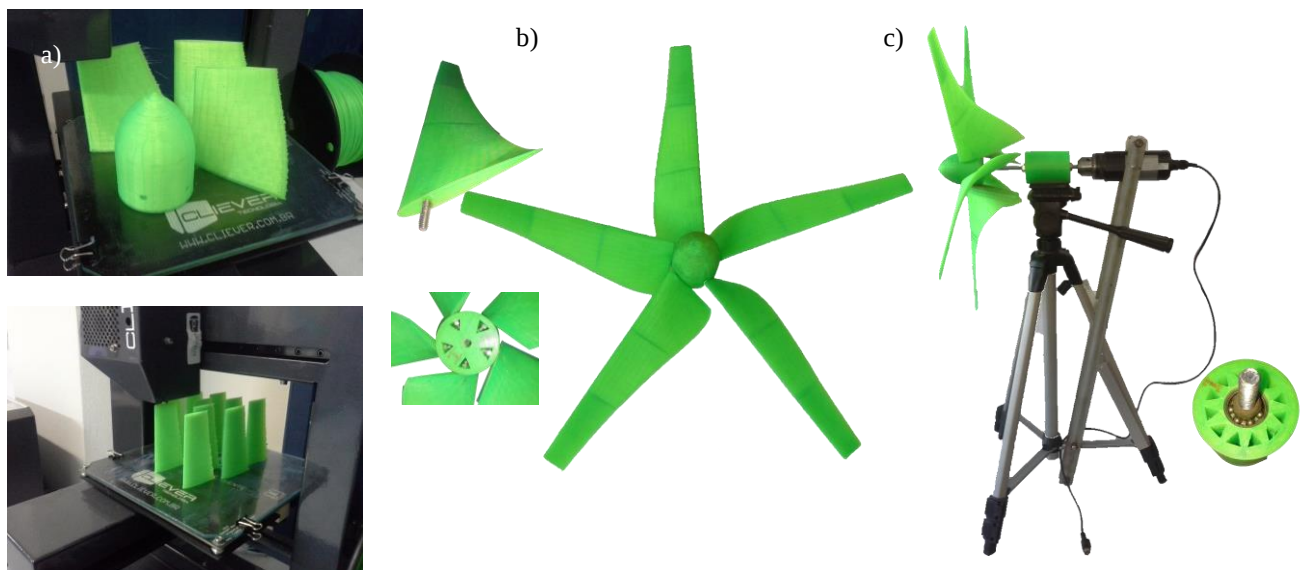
a) Printing of parts; b) Details of the socket of the blades; c) Installation and detailing the prototype shaft
